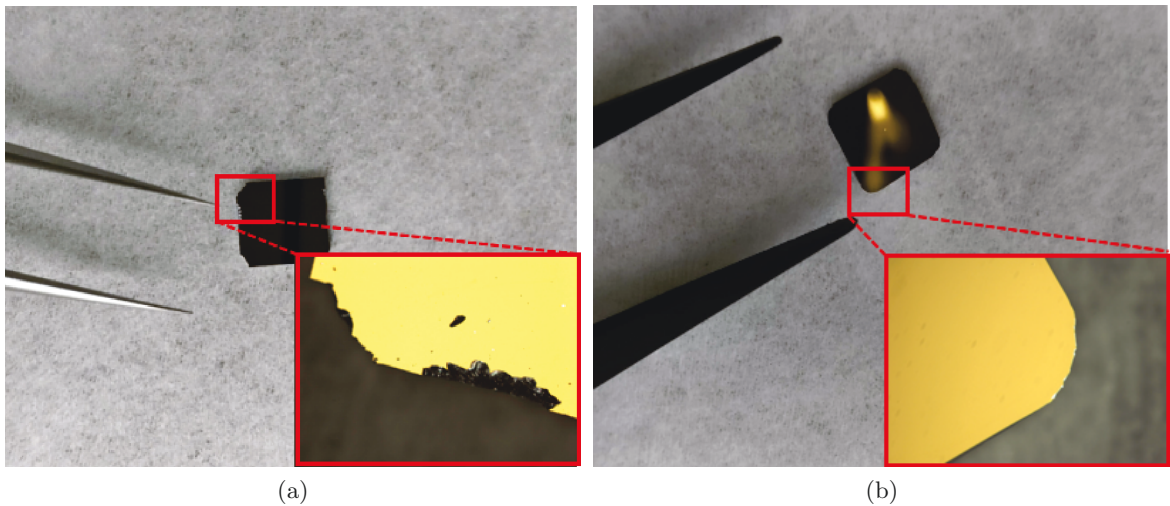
Chip handling with tweezer. (a) Chip with damaged edges caused by Steel tweezer; inset shows zoomed in image of the damage under a microscope. (b) Clean edge when carbon fiber tipped tweezer was used to handle the chip; inset shows zoomed in image of edge.
